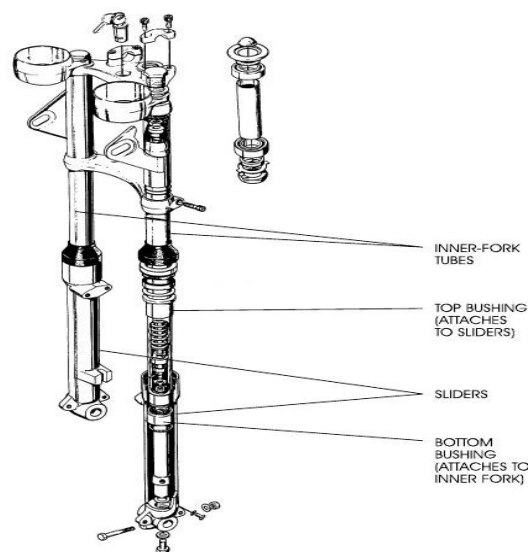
is a cutaway of a telescopic fork assembly showing the top and bottom-fork bushings
